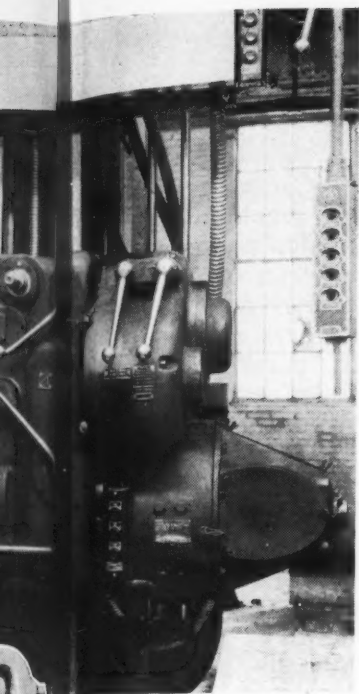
(Center)—Careful attention was given to appearance of this drill sharpener, built mainly of cast iron. Fig. 2—(Bottom)—Head for a combination horizontal boring, milling and drilling machine reveals application of a variety of steels, cast iron and other materials
